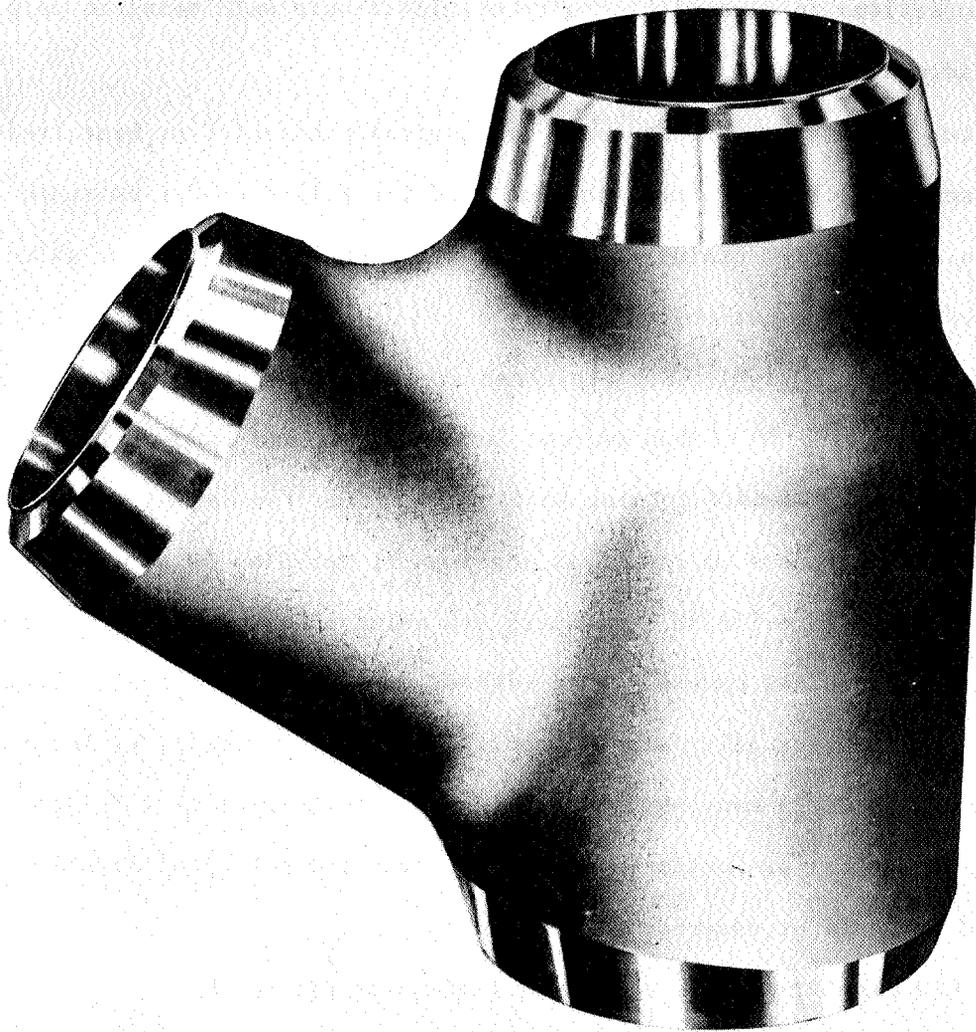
TYPE 304 STAINLESS STEEL FORGED HIGH PRESSURE TUBE FITTING FOR STEAM REACTOR
